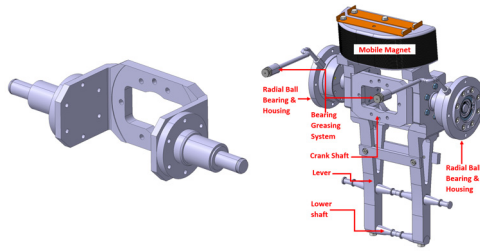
3D Illustrations of the dump's crank shaft & the lever assembly.
